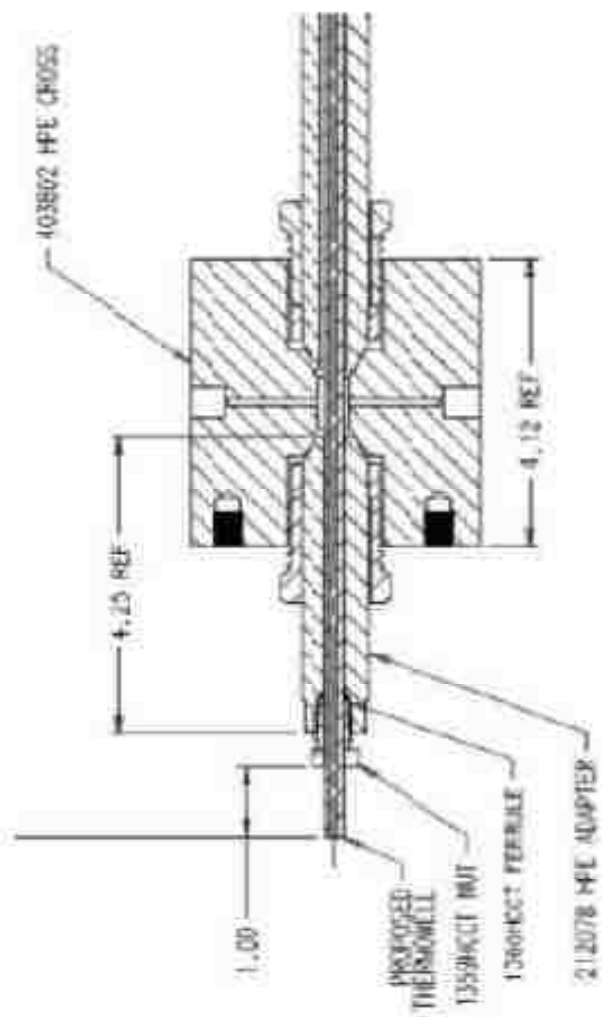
Inconel 625 adapter cross, reactor and thermowell adapter.
